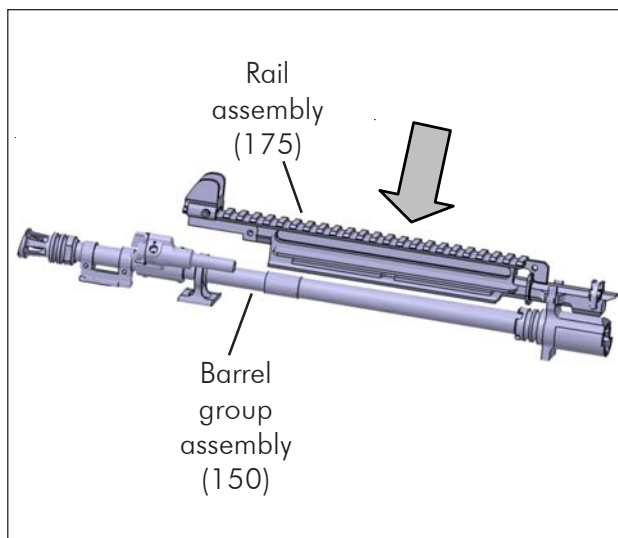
x - Reassembly of the rail assembly (175) in the barrel group assembly (150)
